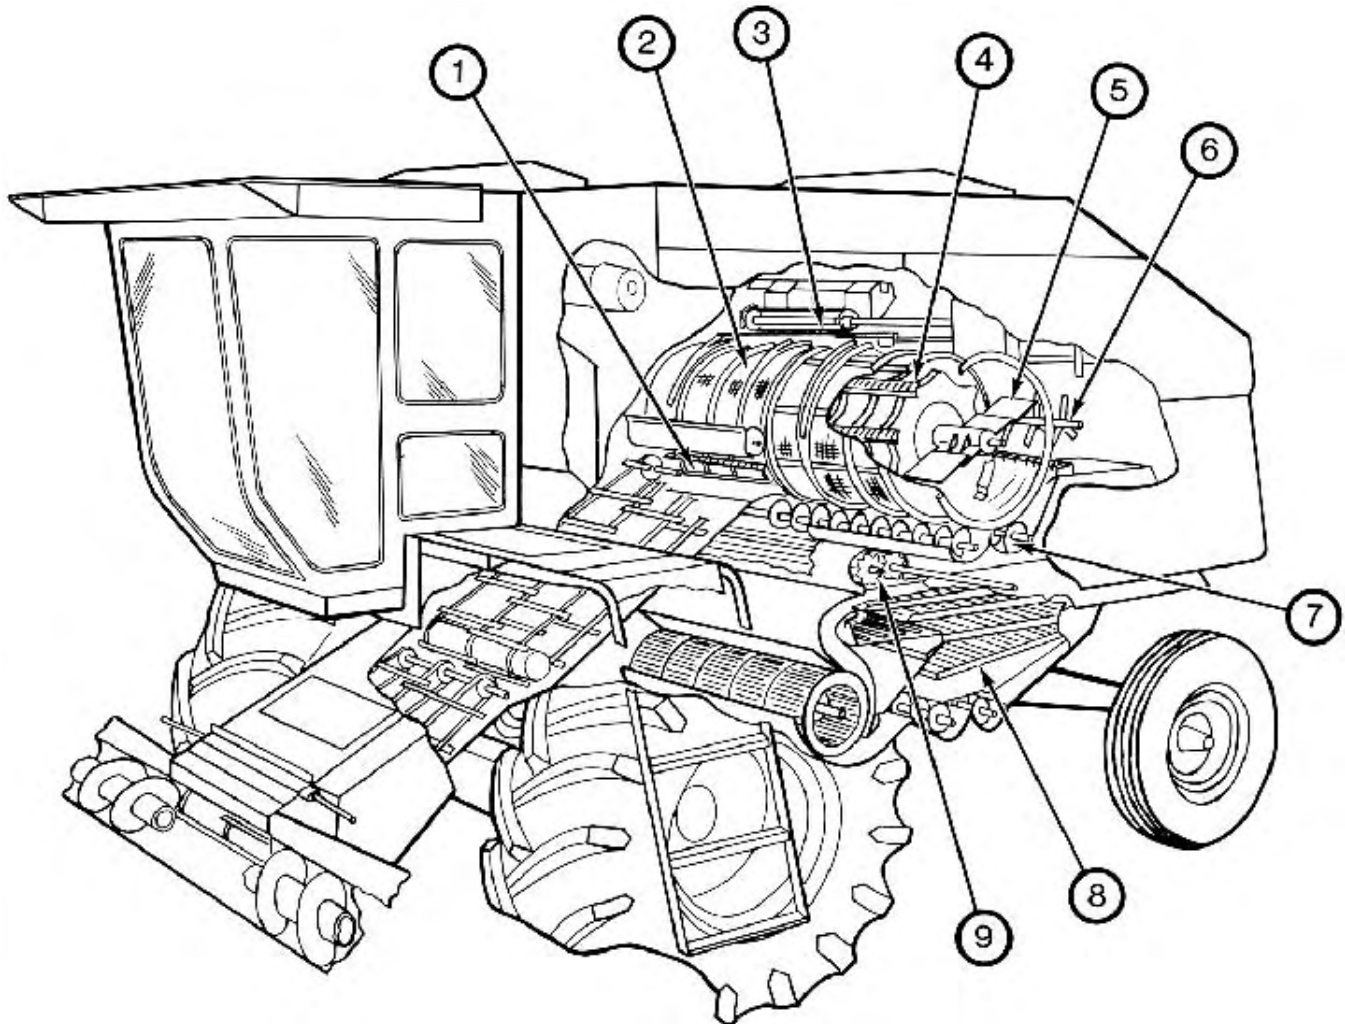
Allis-Chalmers Gleaner N7: (1) Concave. (2) Cage. (3) Cage Sweeps. (4) Rotor (5) Discharge Paddles. (6) Straw chopper (7) Distribution Augers. (8) Cleaning Shoe. (9) Accelerator Roils.
